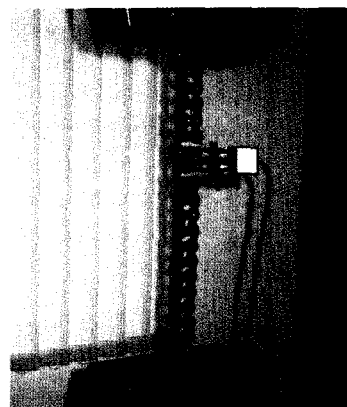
Contact between pin-bush-roller assembly and sprocket tooth
